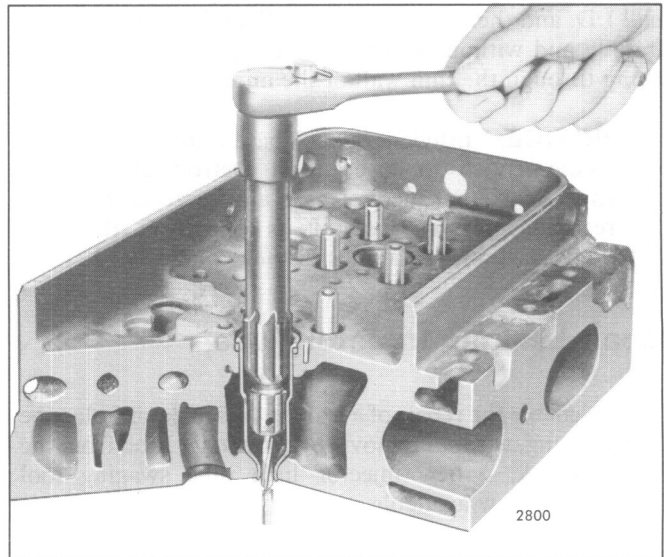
Reaming Injector Tube for Injector Body Nut and Spray Tip with Tool J 22525-1
